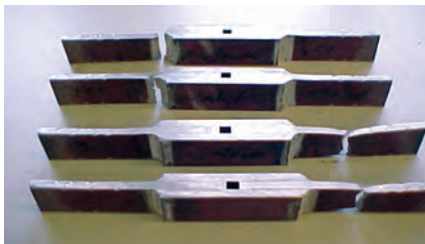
Double welded lap joints, partly made in the shop and partly made underwater for the welding procedure qualification. (Courtesy of the Royal Dutch Navy — Diving Group.)
